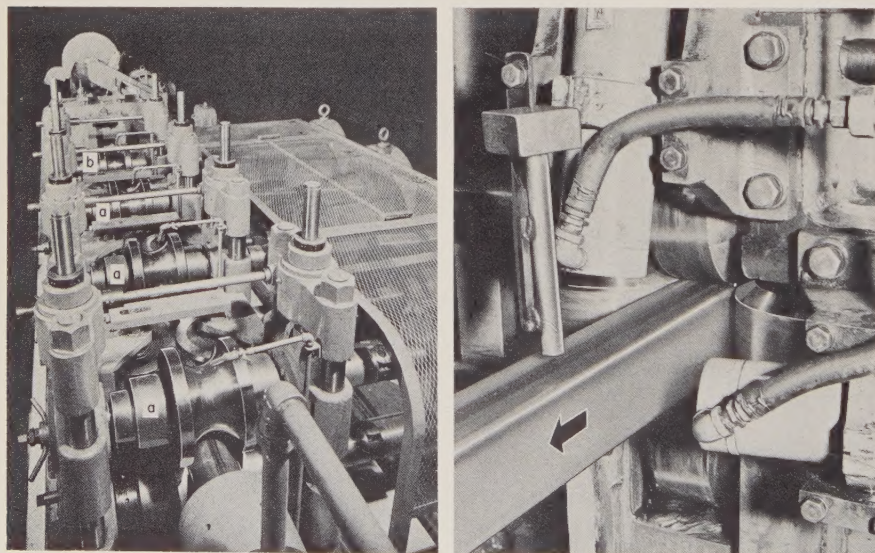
After the circular tube leaves the resistance seam welding station, it passes through a series of four sizing rolls (a and b left) before entering the turks head where it is transformed from a circular to rectangular section having the desired side rail dimensions (right). Sizing rolls (a) maintain the tube's circular form while sizing roll (b) is used to augment the two sets of sizing rolls in the turks head and allow for a gradual breakdown of the tube from the circular to the rectangular section.
